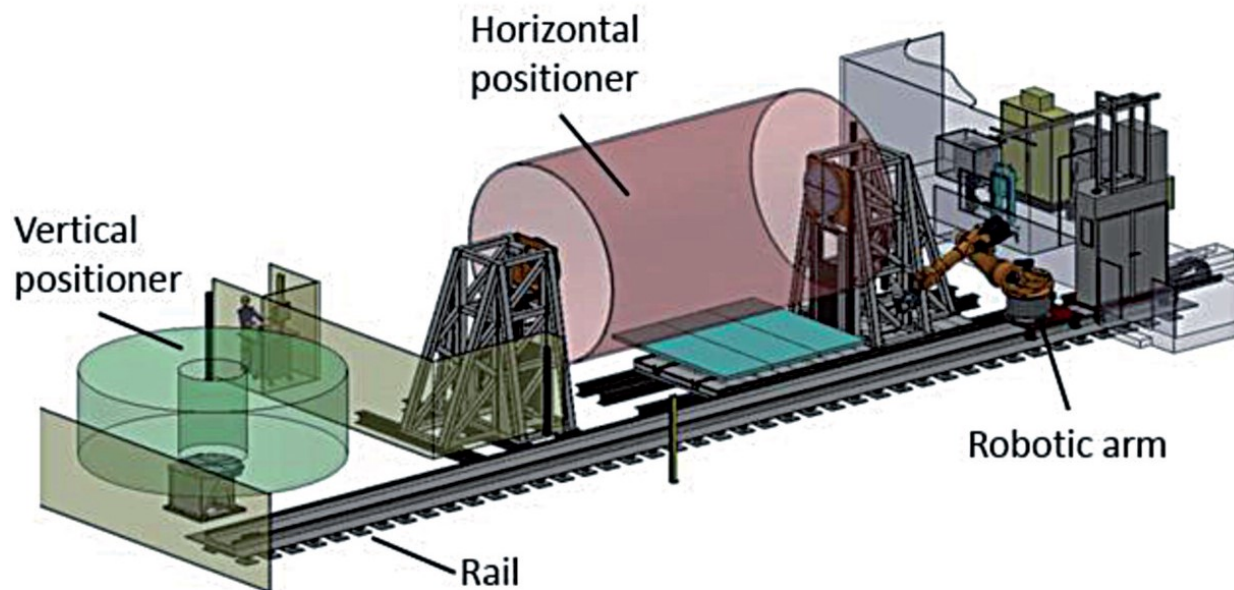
AFP Machine Equipped with Rail and Two Mold Tool Positioners [19]
